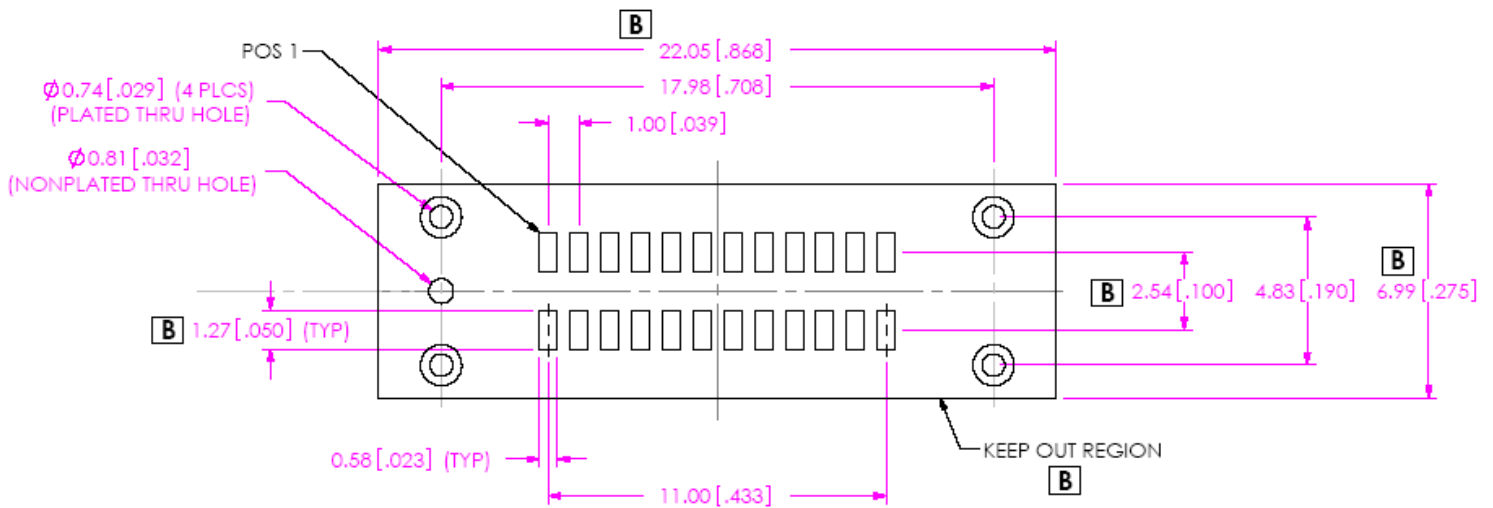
PCI Express™ industry standard half size footprint dimensions, pin numbering, and specification. Samtec SCTP-08-xx footprint.
